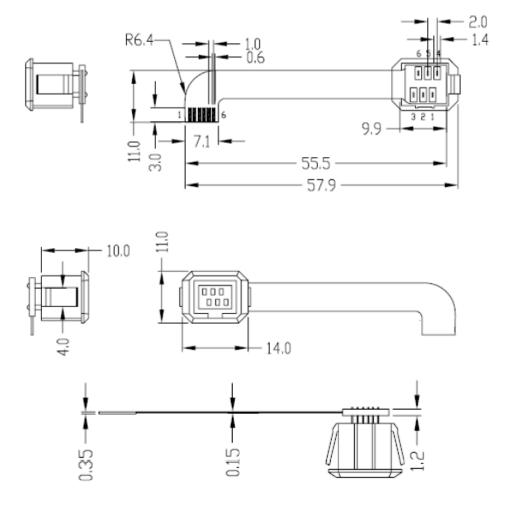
SMARTsat® sensor basic flex cable dimensions
